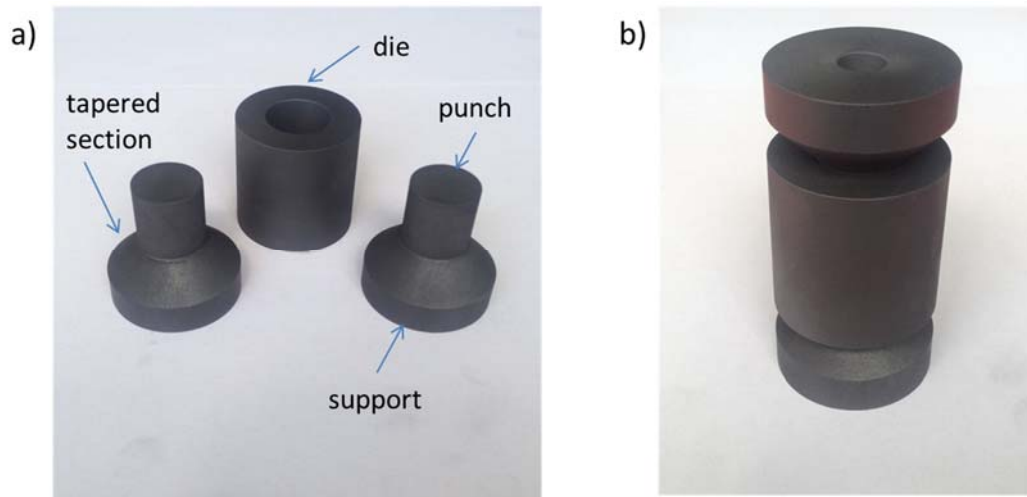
Graphite dies and punches used for sintering, a) Unassembled tooling including die and punches b) assembled tooling kit.
